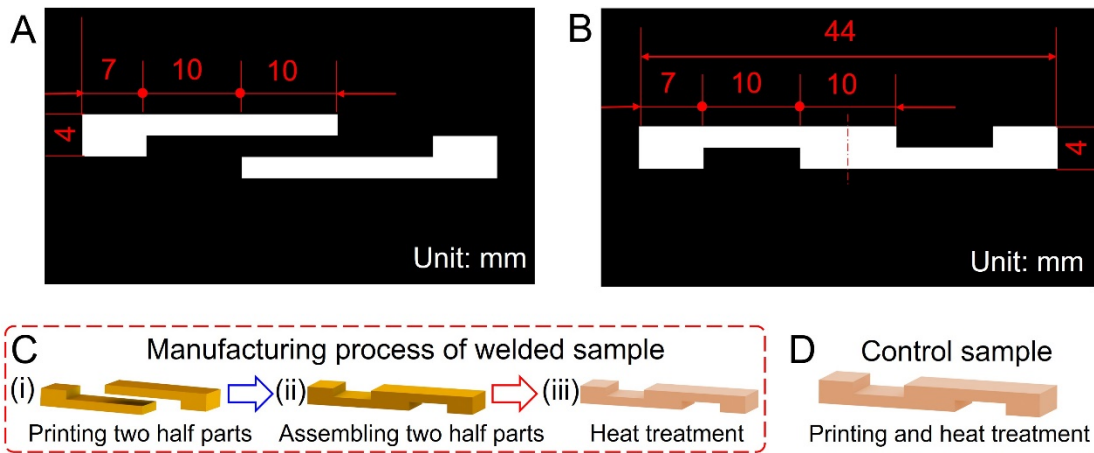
Design and manufacturing details on the sample for lap shear experiment. (A) Side-view profile dimensions of the welded sample. (B) Side-view profile dimensions of control sample. (C) Manufacturing process of a welded sample. (D) Manufacturing process of a control sample.
